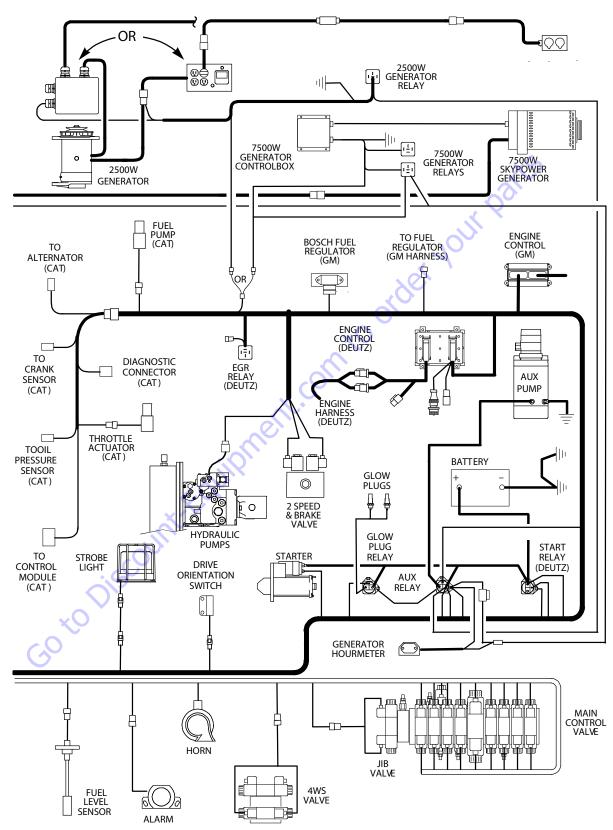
Electrical Components Installation w/ADE (S/N 0300140000 to S/N 0300183033) - Sheet 2 of 2
